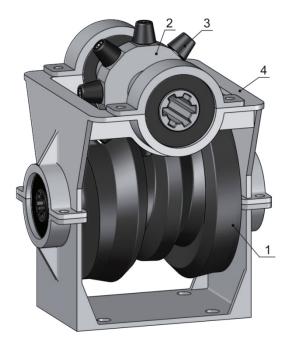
The gear demonstrator – CAD model; 1–worm, 2–body worm wheel, 3–rotary tooth, 4–frame
